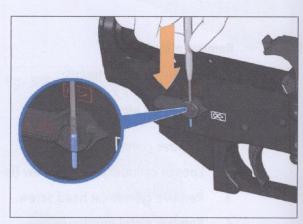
Extracting the clamping sleeve for the right-hand safety lever
